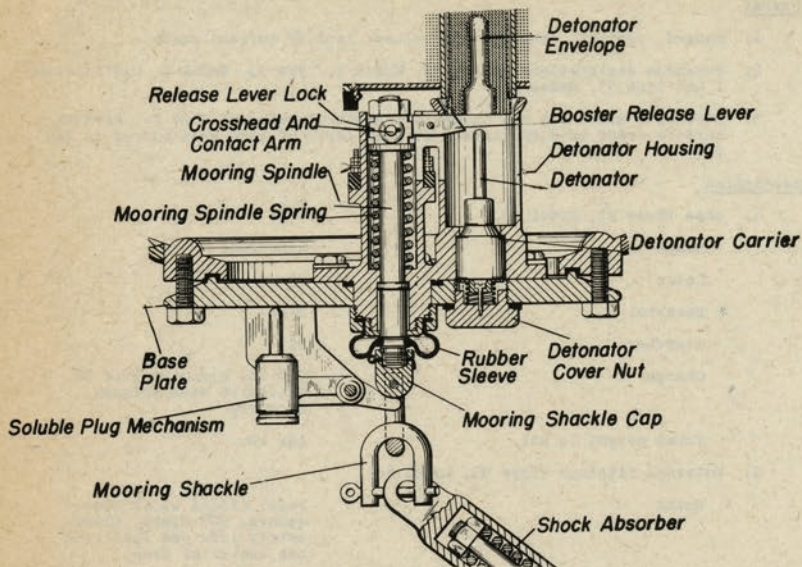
Mine Type JB, Straight - Shank Base Plate , Sectional View
